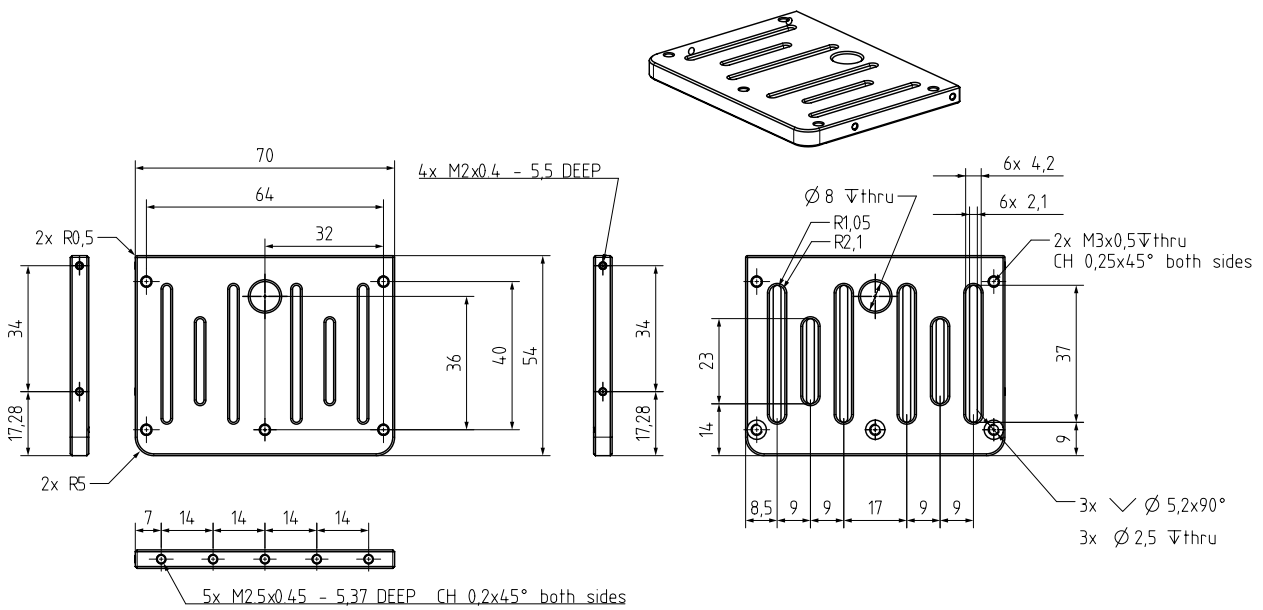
Dimensional drawing of MECH-XS-5P-BASE-N platform
